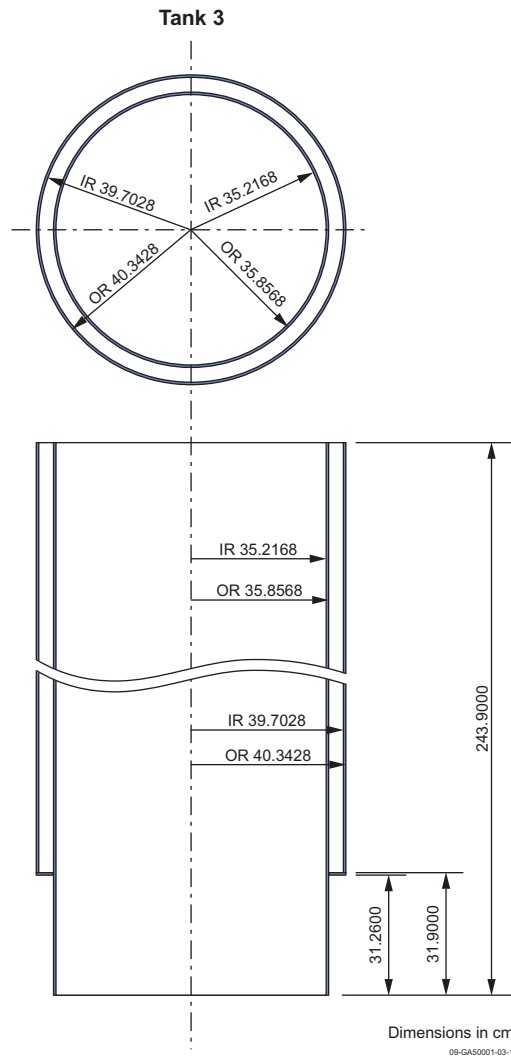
Tank 3 Dimensions Simple Model, Bottom 31.26 cm is the Extended Skirt.
